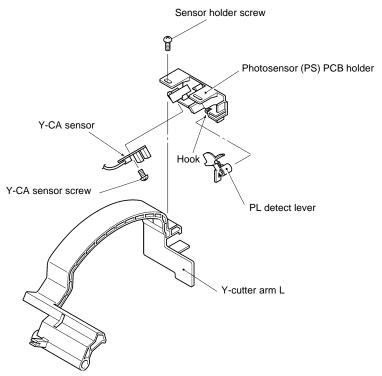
Disassembling the Y-cutter Arm L
